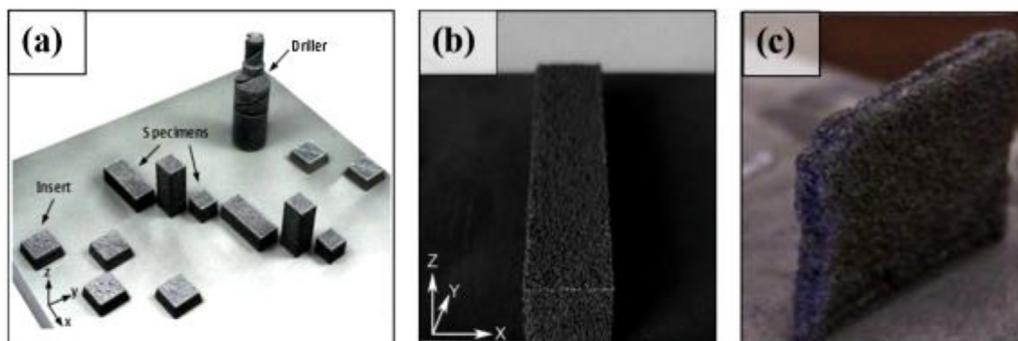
Examples of Cermets fabricated via [282]: (a) SLM [293]; (b) direct laser sintering [294]; (c) LENS [295].
